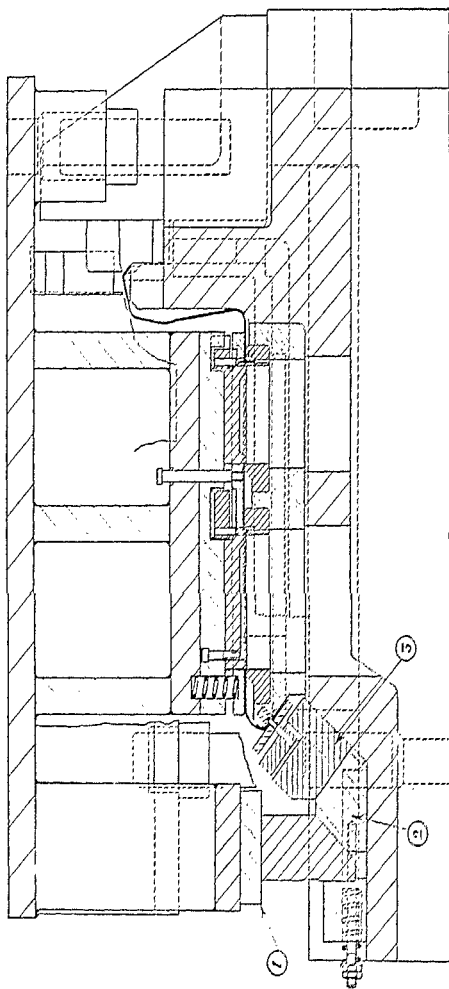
Cam-actuated and conventional type piercing die (workpiece shown in Fig. 12-13).
